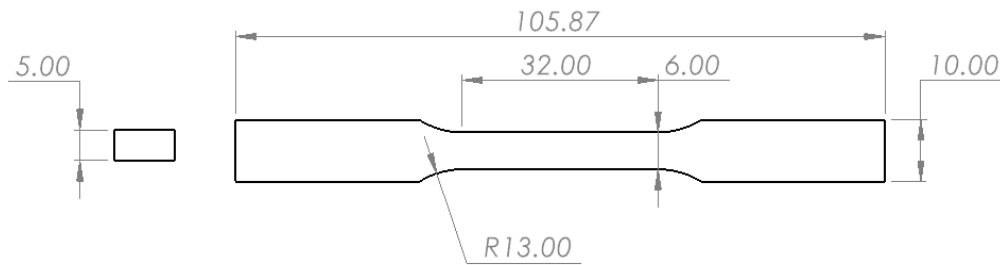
Drawing of ASTM E8 subsize specimen geometry used for tensile testing, dimensions in millimeter.
